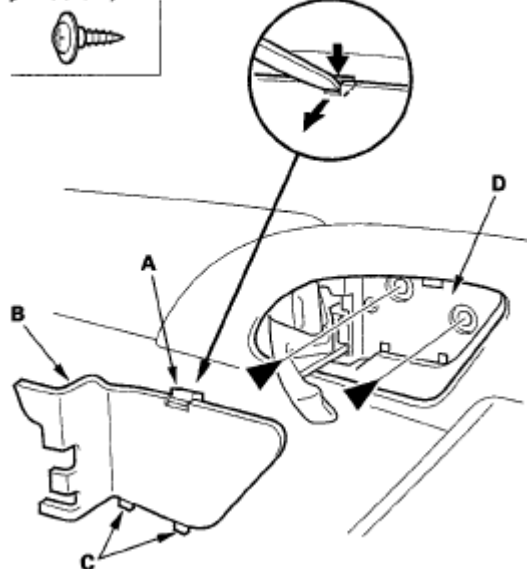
Identifying Upper Hook, Inner Handle Cap, Bottom Hooks And Inner Handle
